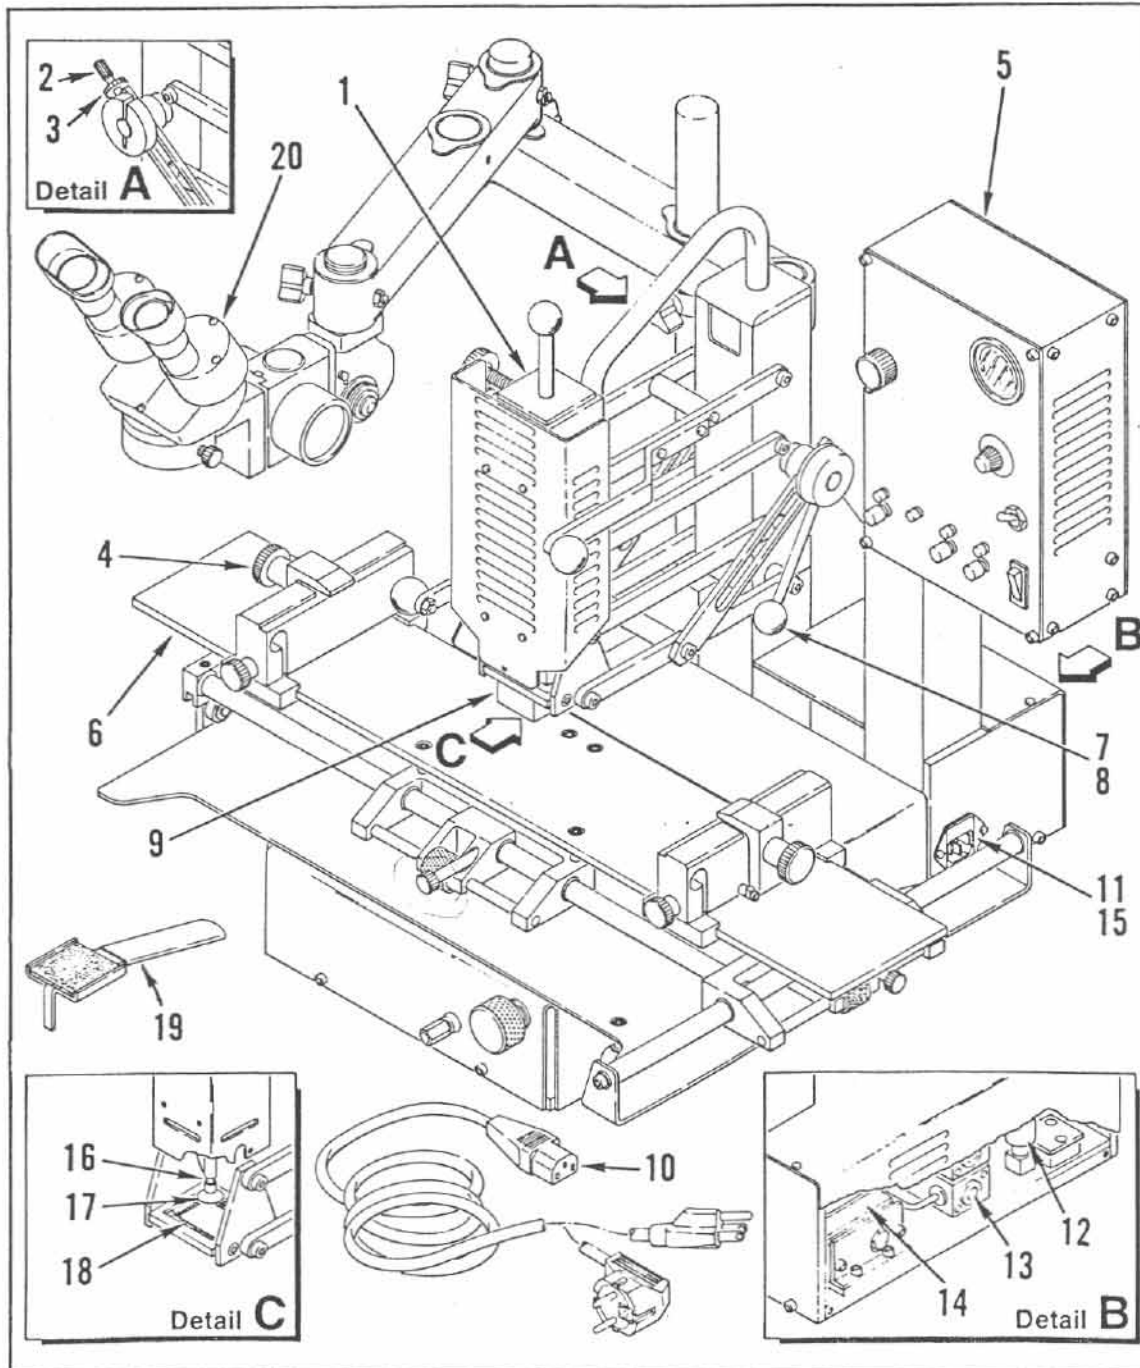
REPLACEMENT PARTS FOR CRAFT-100A SYSTEM
